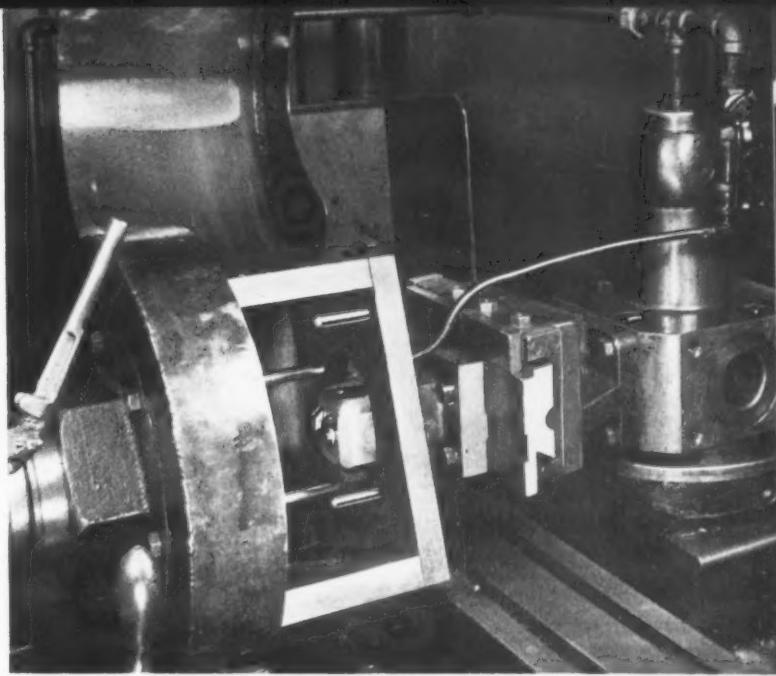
Tooling Provided on a Machine Used for Finish-facing and Burnishing Surface G, Fig. 1, on the Inside of the Water-pump Bodies
